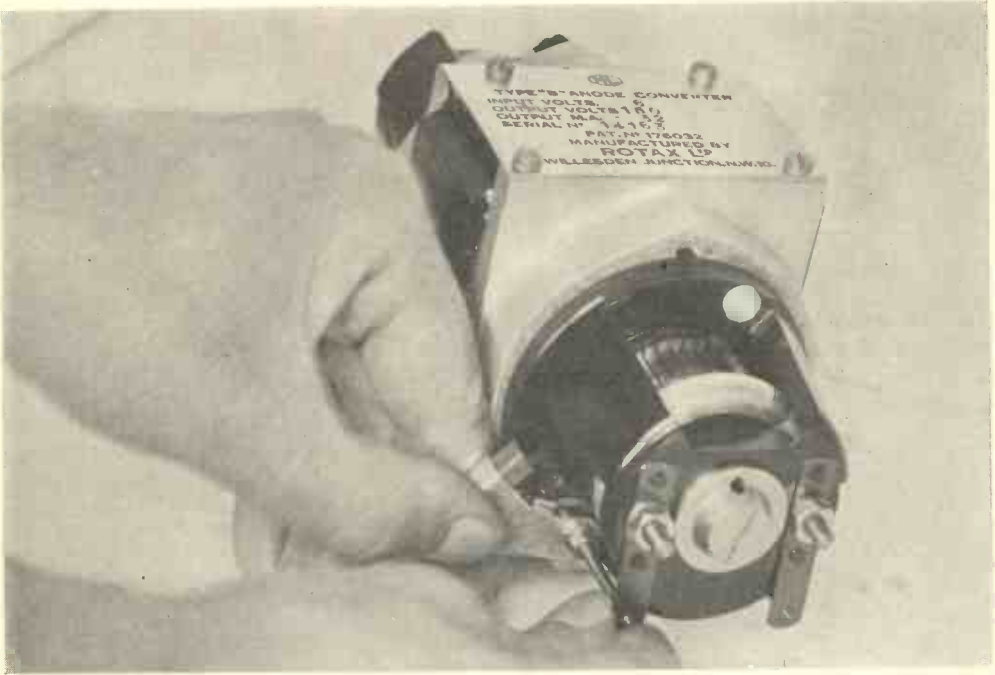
REMOVING A BRUSH HOLDER OF AN ANODE CONVERTER.
